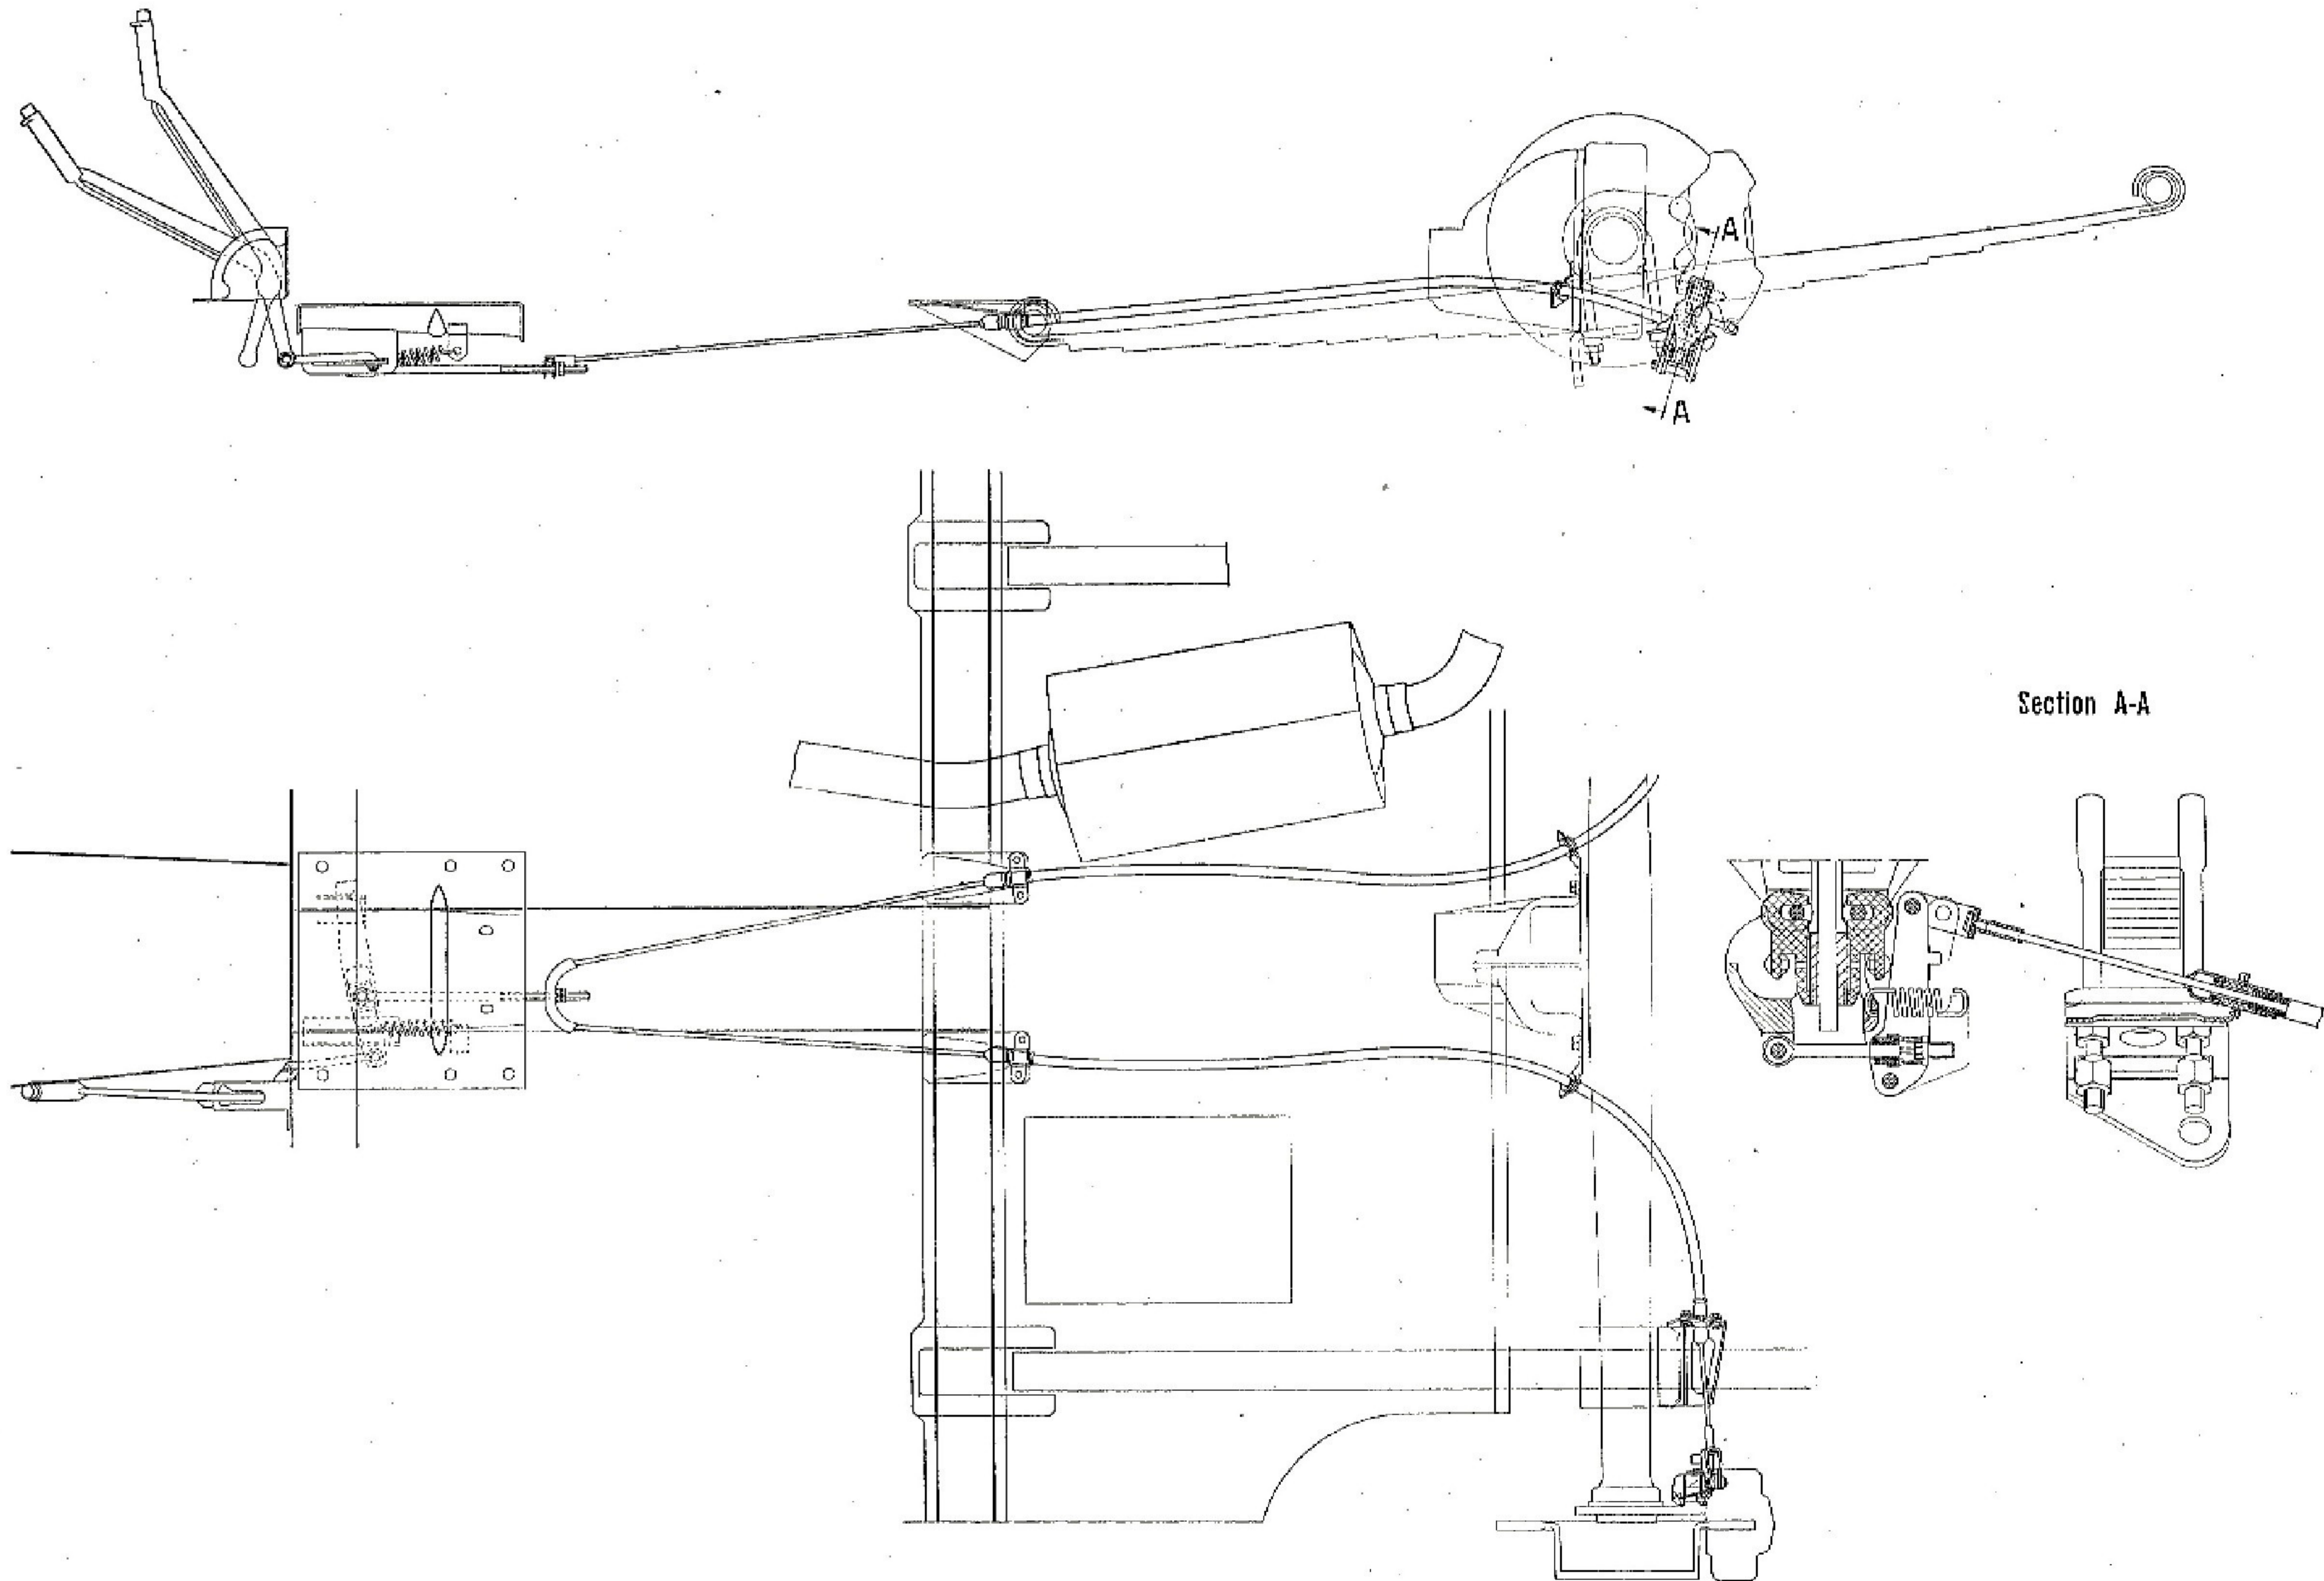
Auxiliary (hand) brake layout, with detail of the control mechanism on a rear disc.
